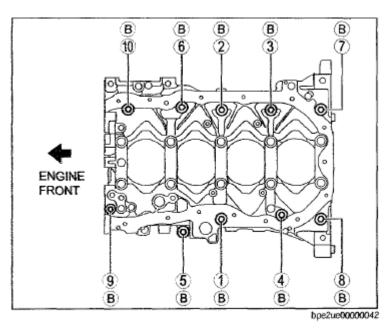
Identifying Lower Cylinder Block B Bolt Tightening Sequence
